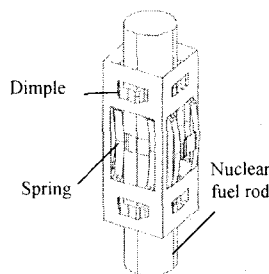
Nuclear fuel assembly Fig. 2 Unit spacer grid
